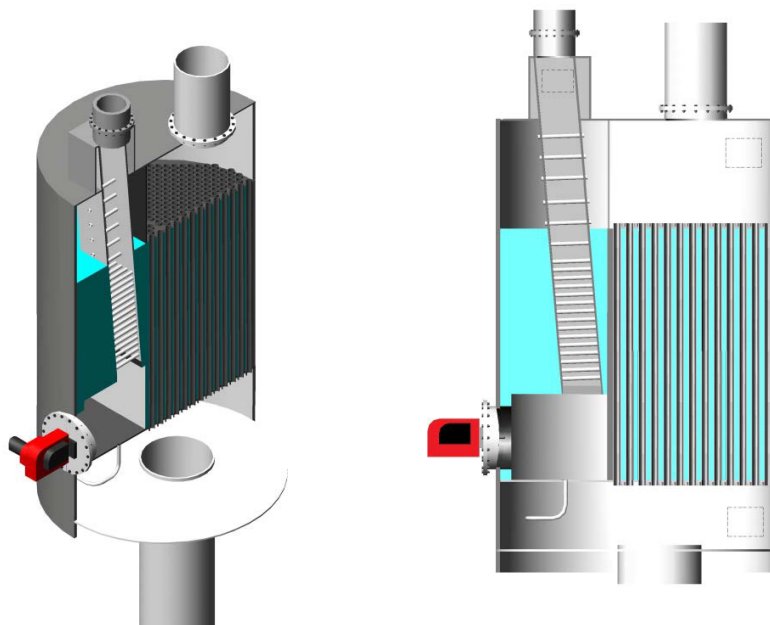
(a) Perspective of Ship Boiler Section; (b) Cross-section of Ship boiler
